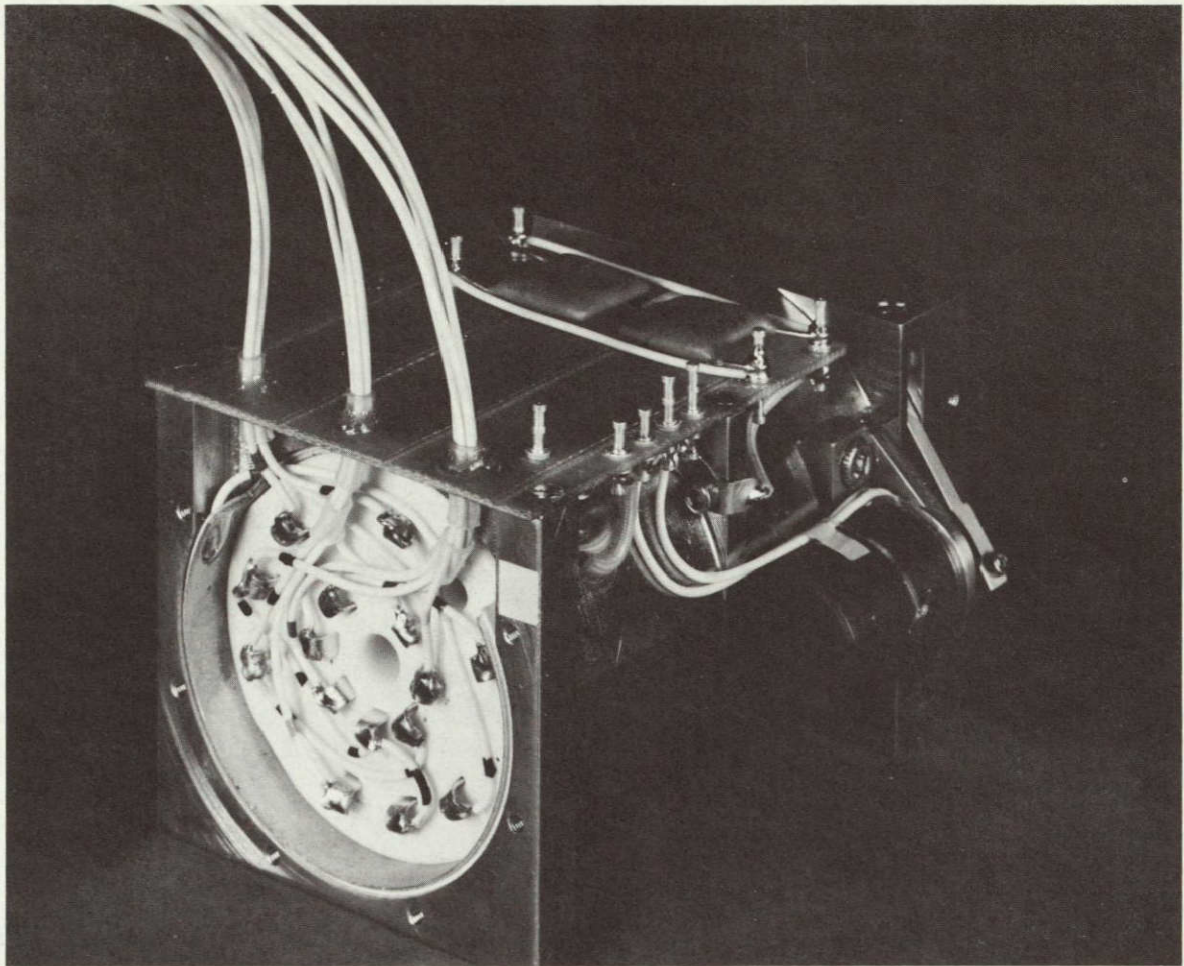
Rear View of a Partially Assembled Detector Mount
